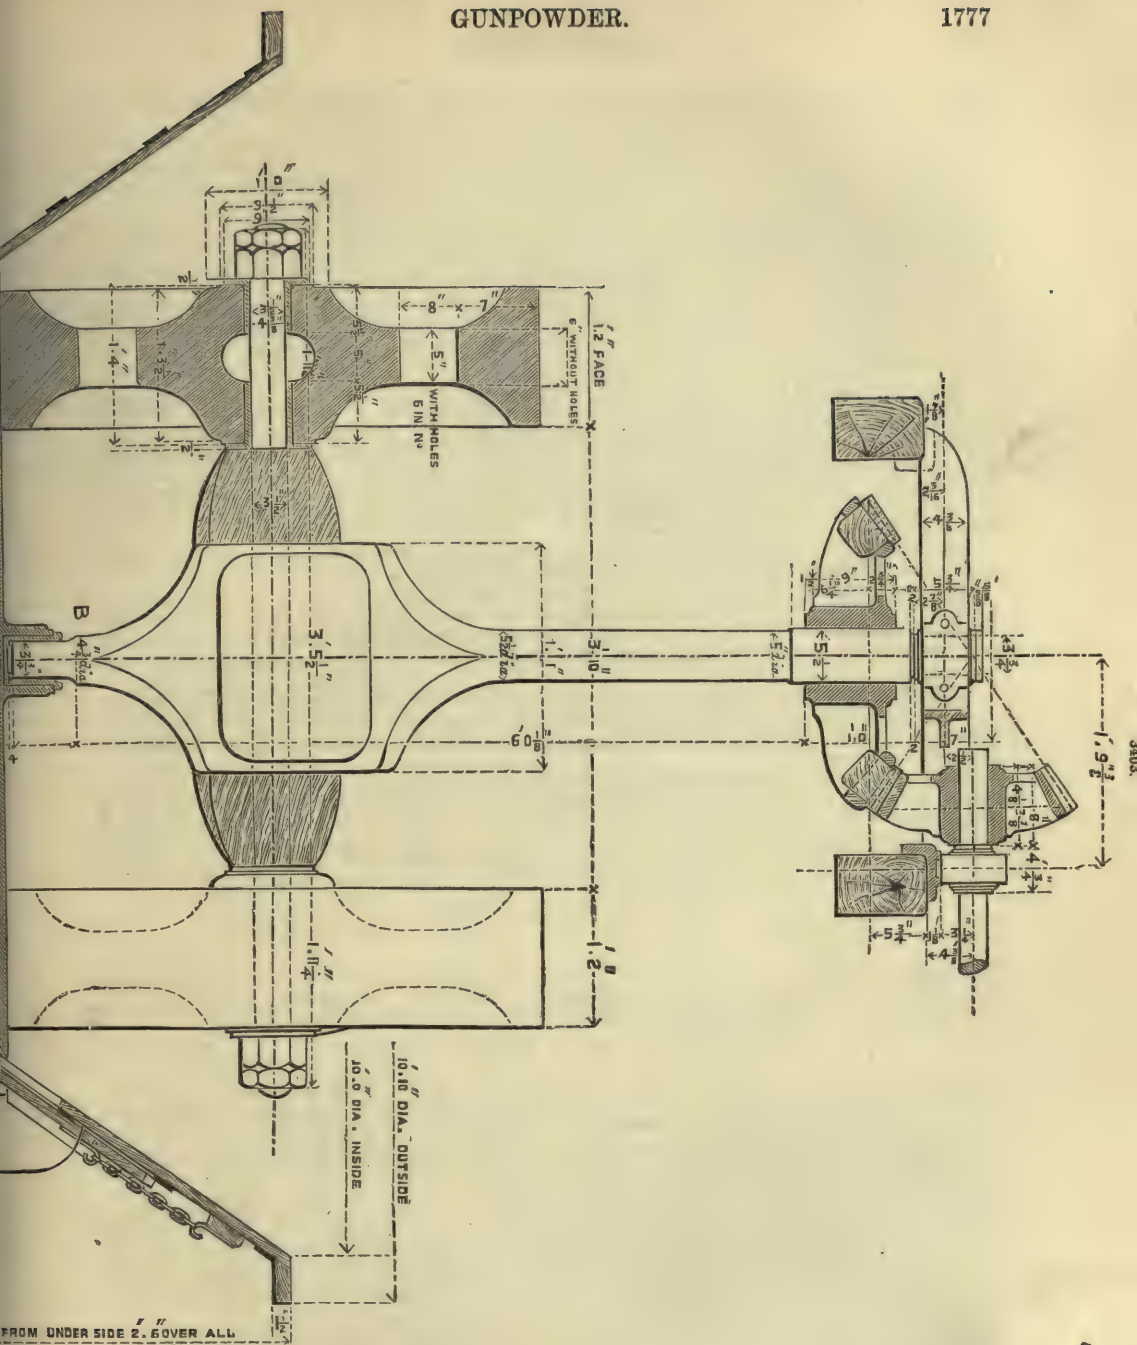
to 3406 give sectional views of the pulverizing and incorporating mill to a larger scale. This machine is made upon the latest and most improved construction, the rolls and pan being made of cast iron, which after many experiments has been found to be the most suitable material for the purpose; the upright and cross spindles are both made of wrought iron, working in gun-metal bearings at each end; the outside frame of the pan is made of wood, and the whole is worked from the main driving shaft by a pair of bevel-wheels, as shown in Fig. 3403. These details are necessary in order to explain the full working of the machinery.
